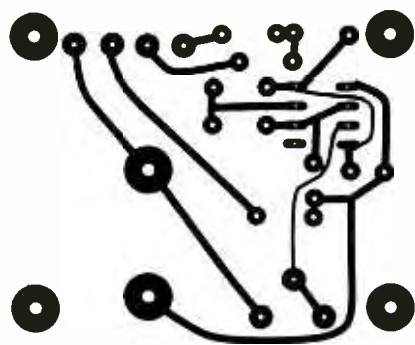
Actual-size etching-and-drilling guide to use for fabricating the project's printed-circuit board.
